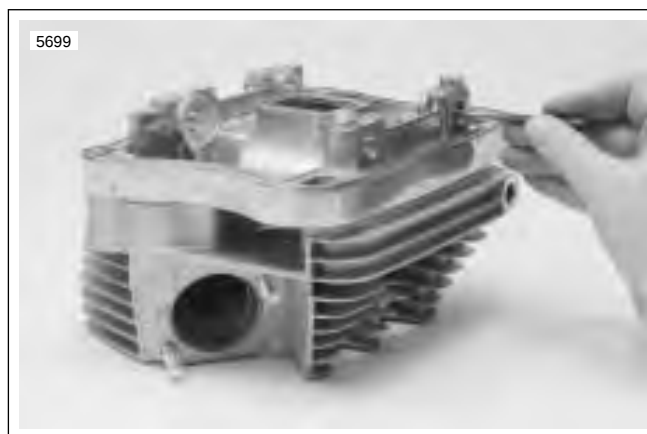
Measuring Rocker Arm Shaft Bore Diameter in Lower Rocker Cover
